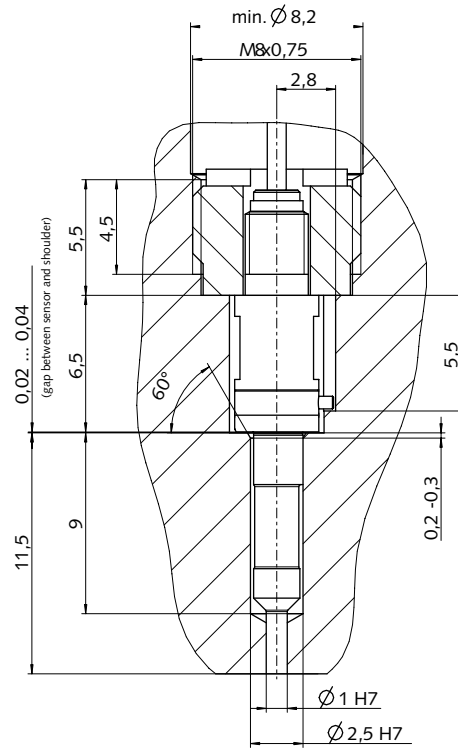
Optional installation with mounting nut Type 6460A1 and keyway pin Type 65001430
